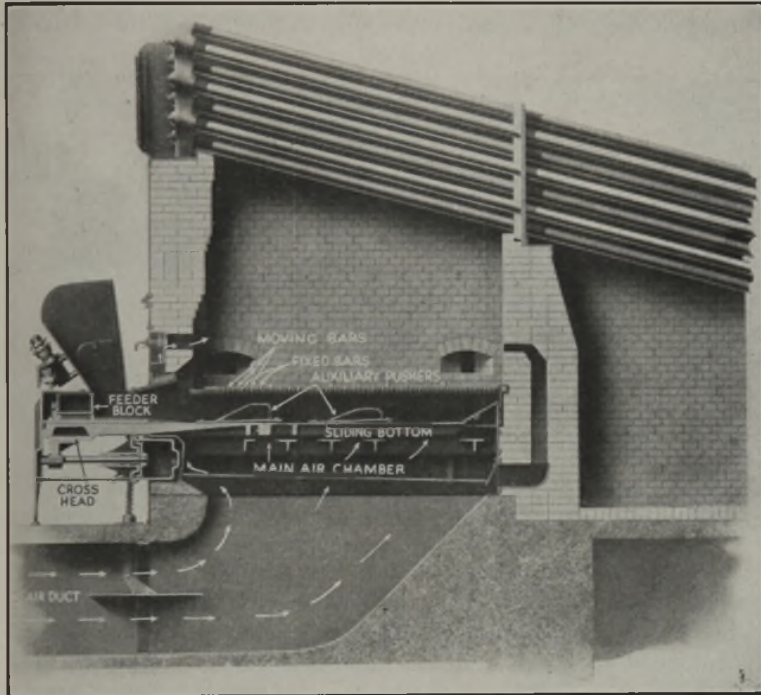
Type E stoker—longitudinal section showing coal-feeding mechanism and path of entering air.
